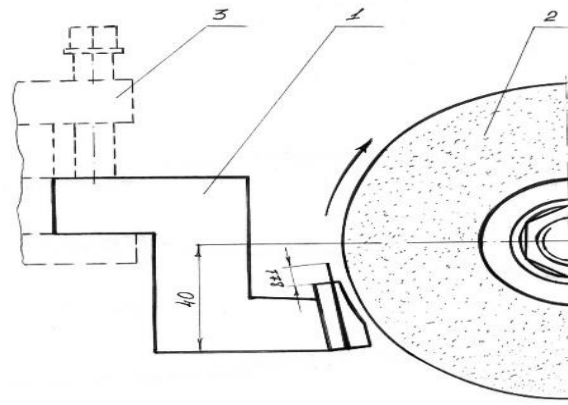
Experimental installation for preparing thin lamellar knives for work. 1- knife holder; 2- sharpening shaft; 3- machine cutter holder.
